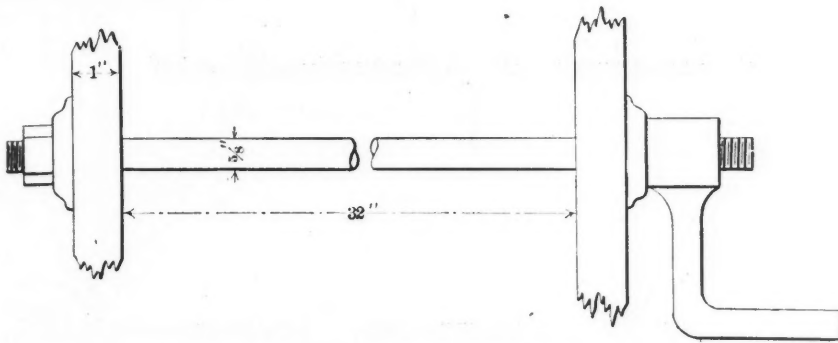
DEVICE FOR HOLDING DOORS IN PLACE
